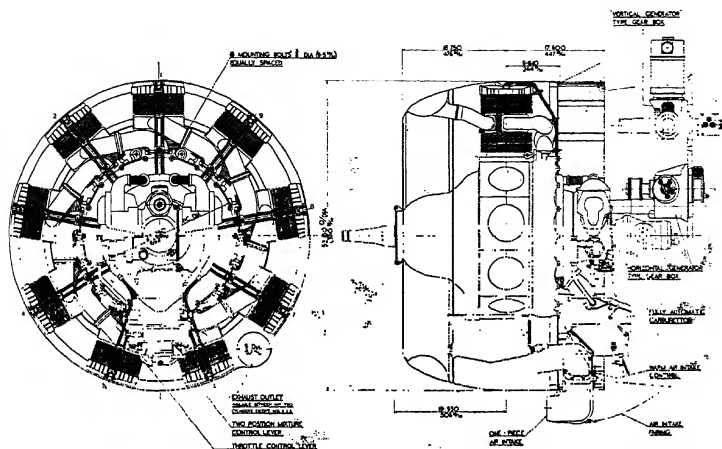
INSTALLATION DIAGRAM FOR PERSEUS ENGINE.
